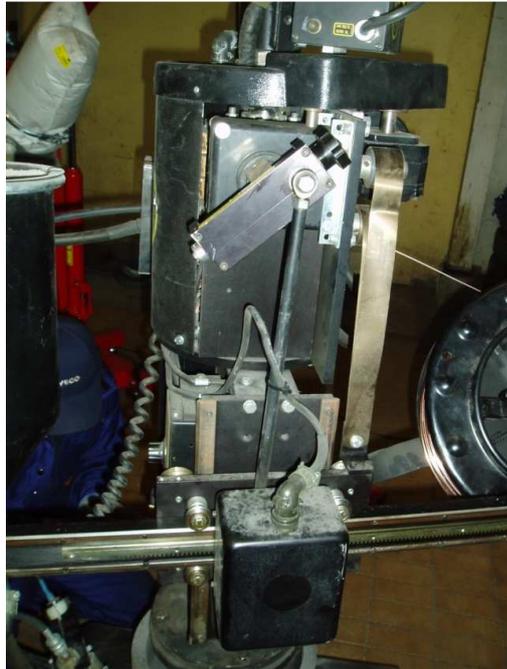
Saddle line follower rise and fall cam of a circle welder (H. Salkinoja)
